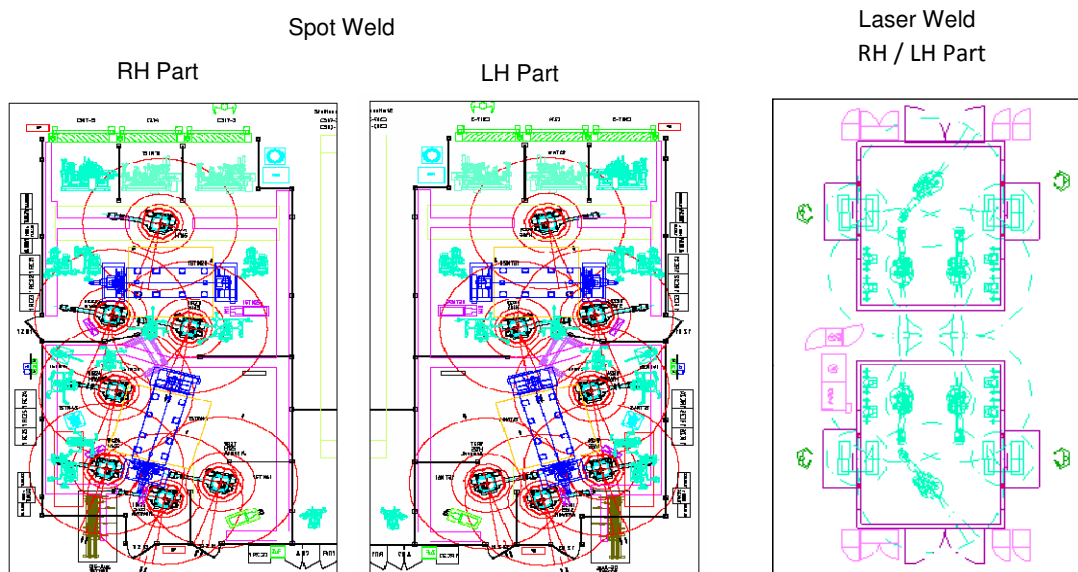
Comparison between spot welding and laser welding showing the savings in body shop floor space
